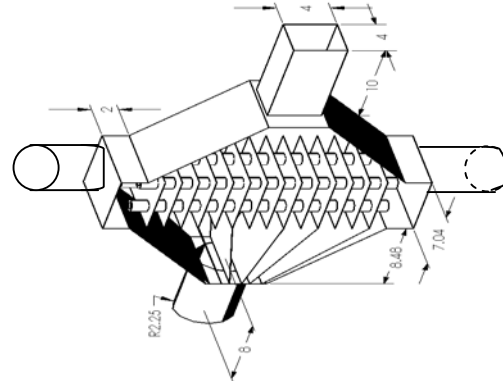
A view of the designed heat exchanger (dimensions are in cm)
